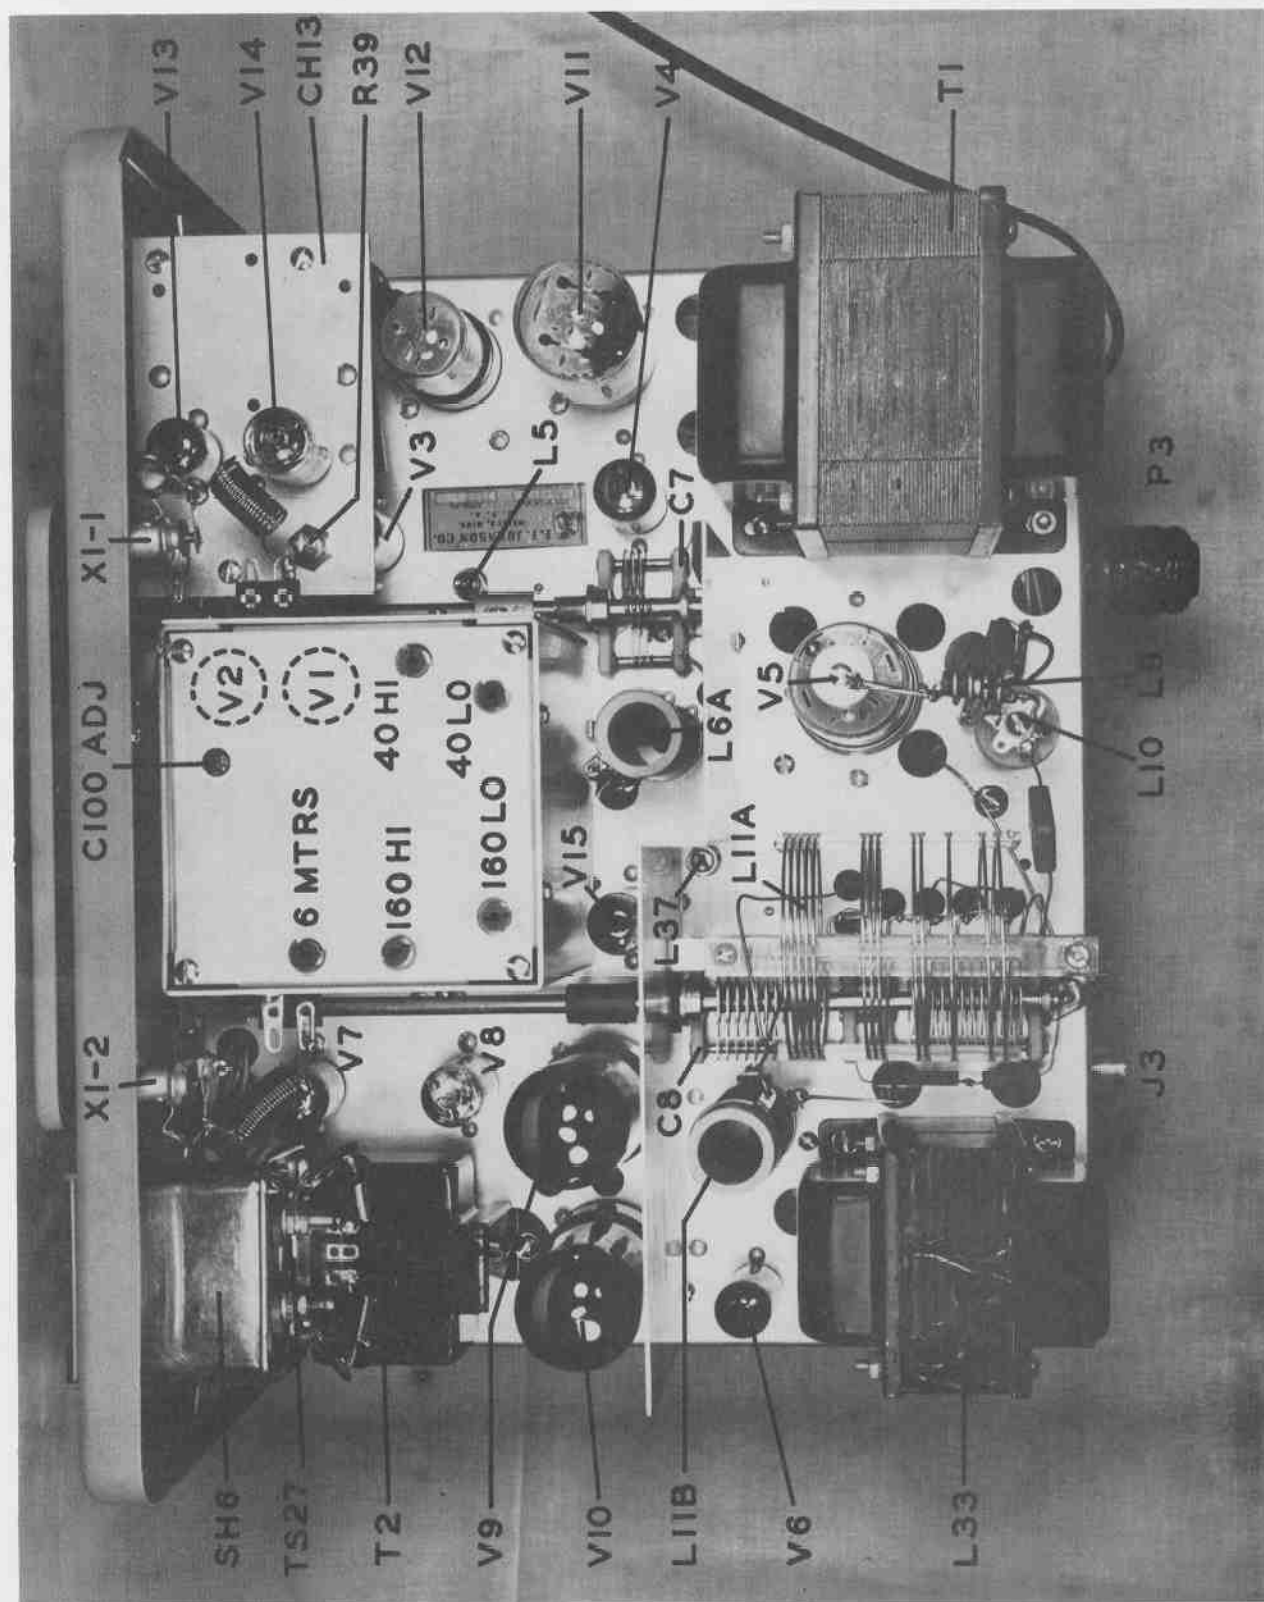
COMPLETED CHASSIS TOP VIEW
